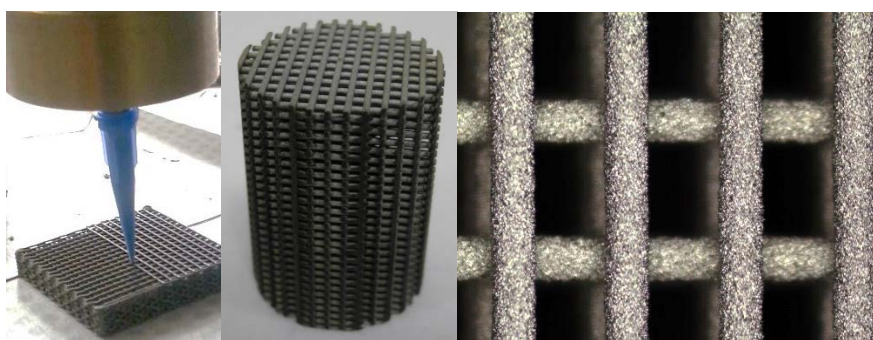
3DFD manufactured and sintered 316L type stainless steel support (3D-SS) in 1-1 stacking.
